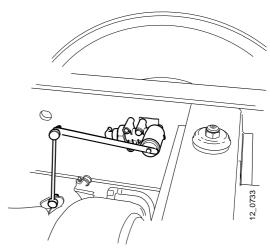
The rear level sensor is located on the right-hand side of the frame above the drive axle.
